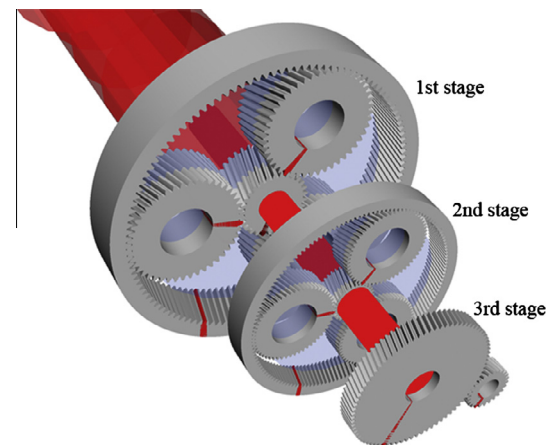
Three-stage gearbox for 5 MW wind turbine.
